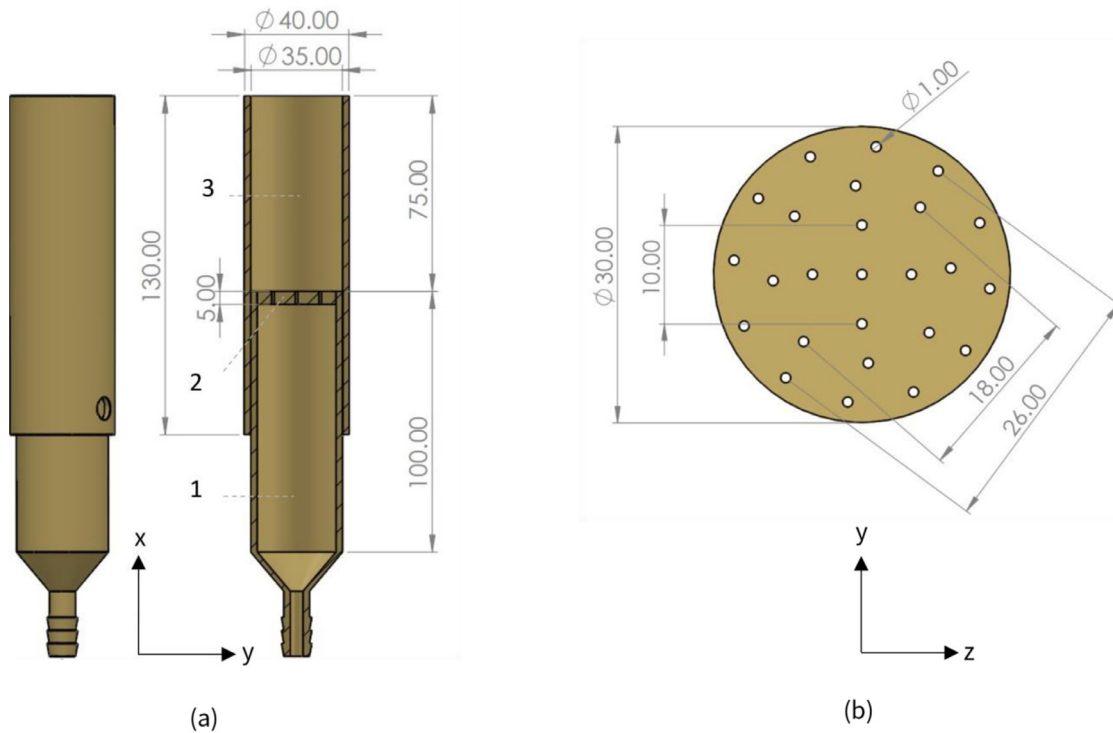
Schematic of the (a) burner assembly and (b) turbulence generator, all dimensions in millimetres.
